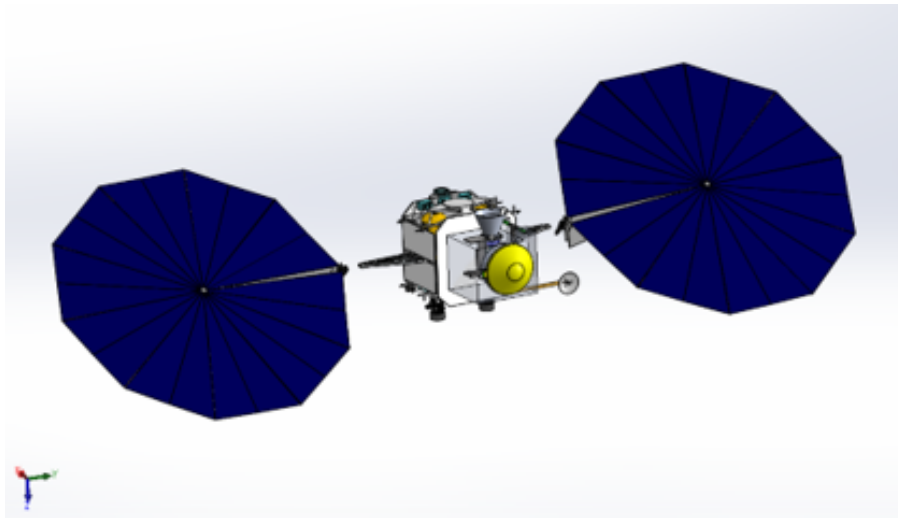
Preliminary Wiper system assembly attached to a concept of the SRO spacecraft.
